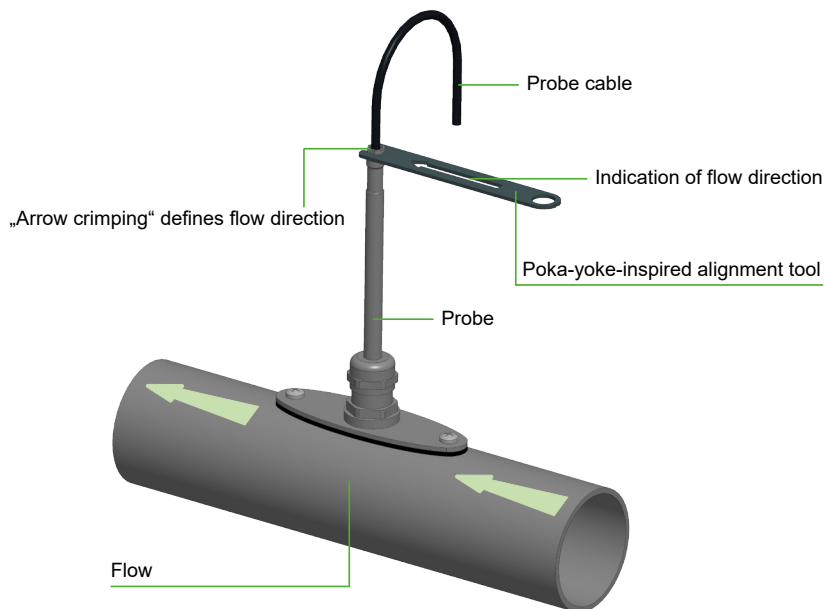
AVS701 Poka-Yoke-inspired probe alignment tool
